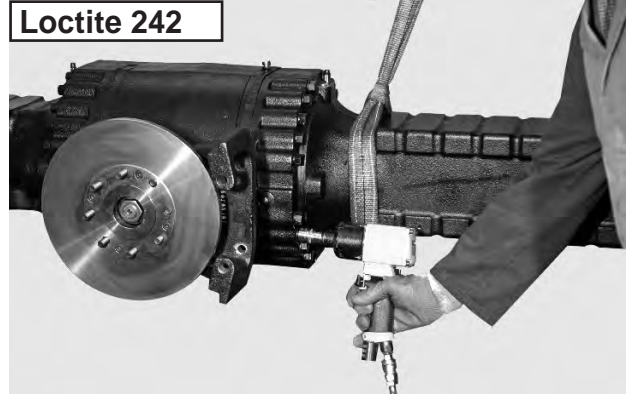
Temporarily lock the arm with screws previously coated with Loctite 242; tighten lightly to make the unit touch the main body.
